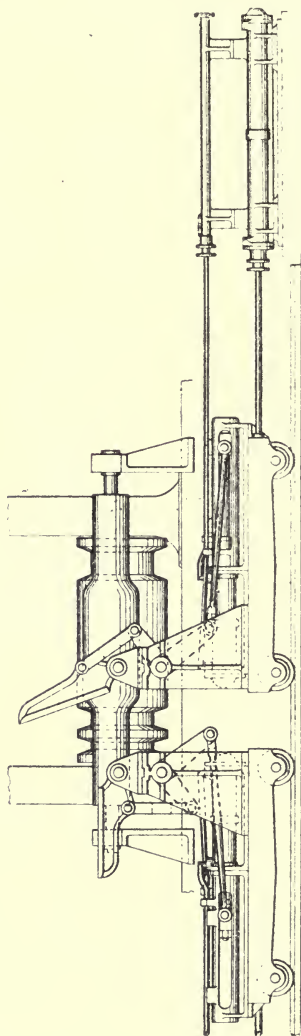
Tilting Gear for 40 in. Slab Cogging Mill.
